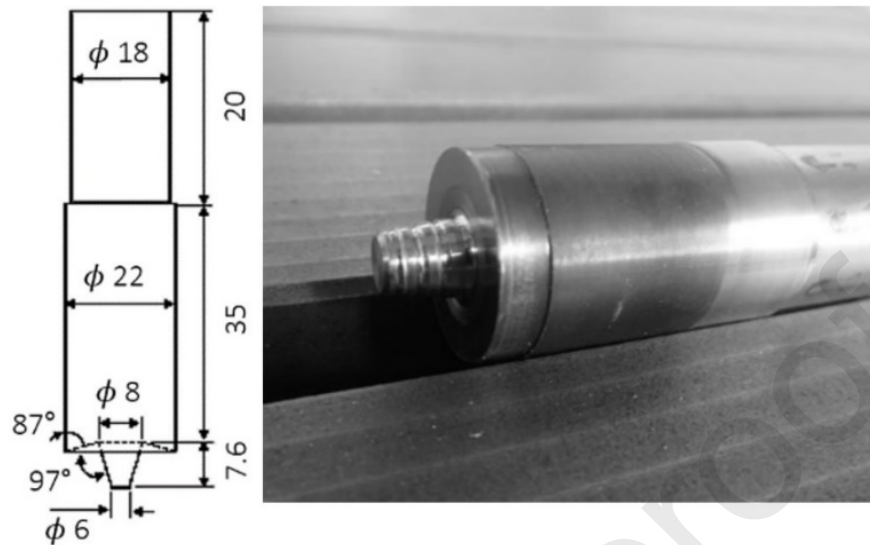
FSW tool and geometric characteristics of the tool (dimensions in mm).
